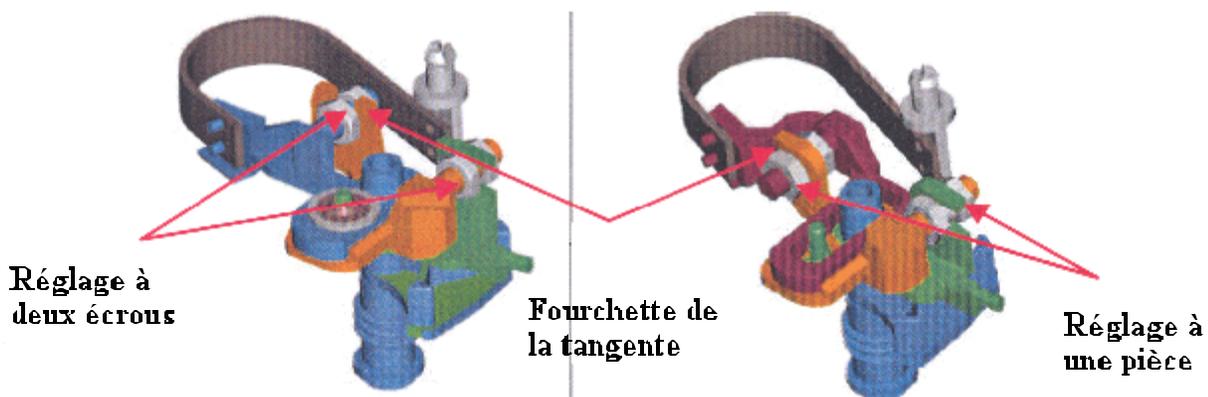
TC adjustment mechanism / mécanisme de réglage, CT
